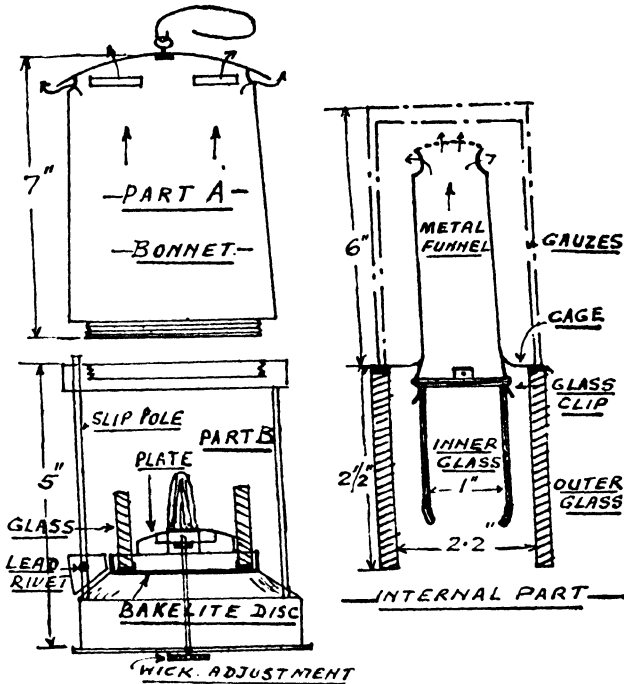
Protector Improved Combustion-tube Safety-lamp.
